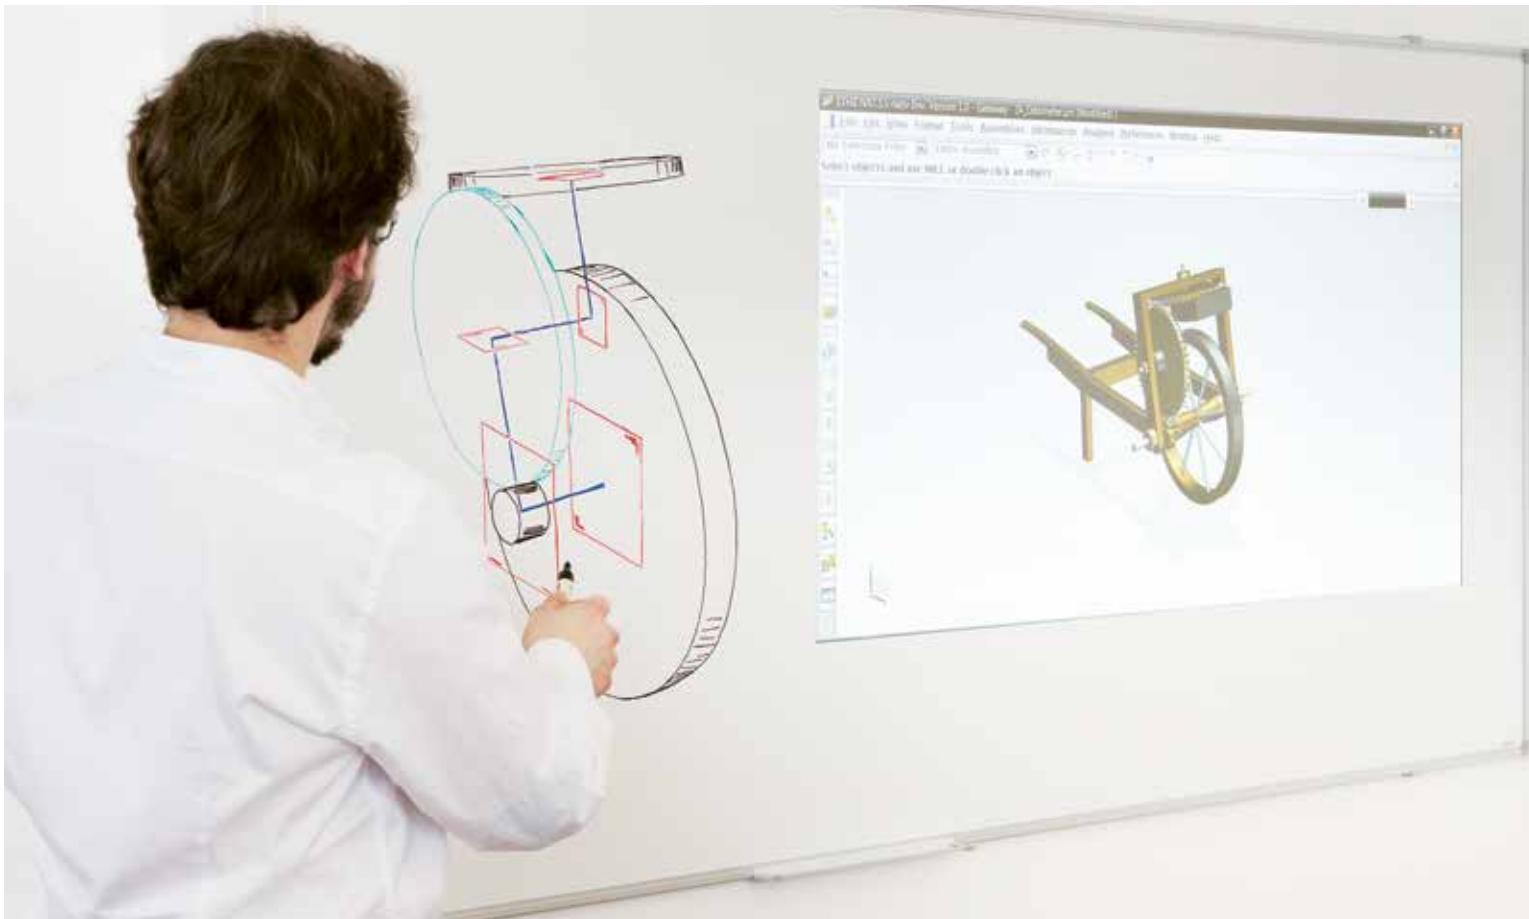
Teaching in Engineering Design: Technical Drawing and CAD
